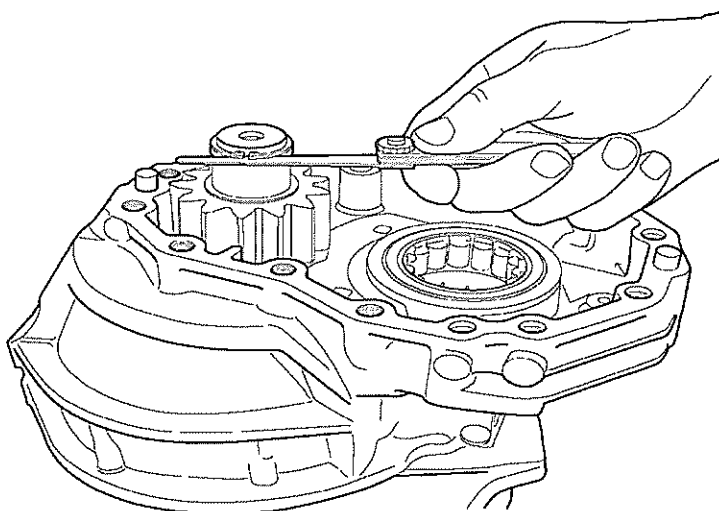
Measuring clearance between drive shaft circlip and pinion gear
